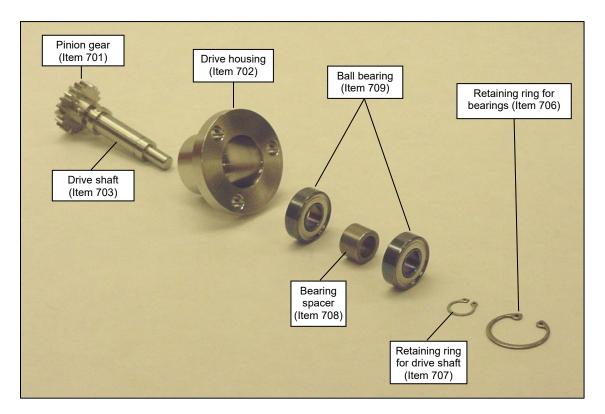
Exploded View of 2PT Source Drive Shaft Assembly
